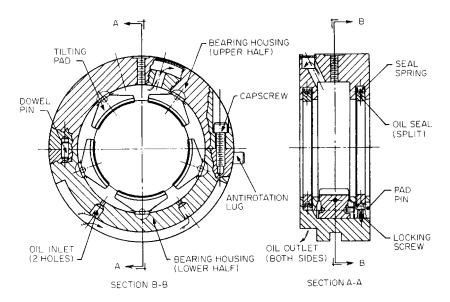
Typical tilting-pad bearing. (Source: Demag Delaval.)
